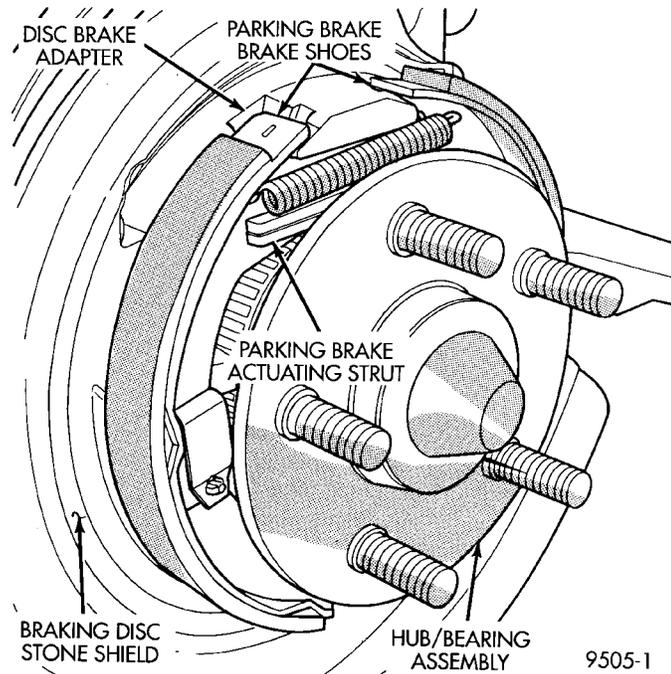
Park Brake Assembly With Rear Disc Brakes
